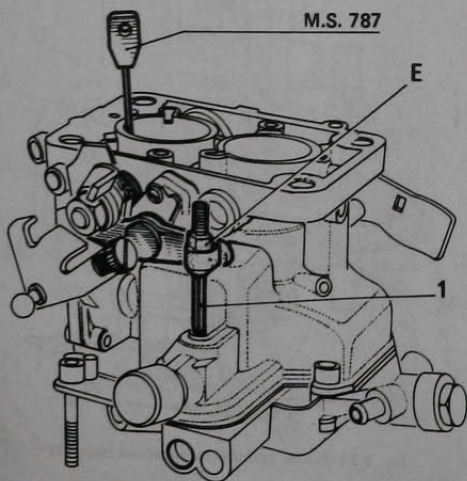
Defuming valve adjustment - Weber carburettor (Sec 17)
